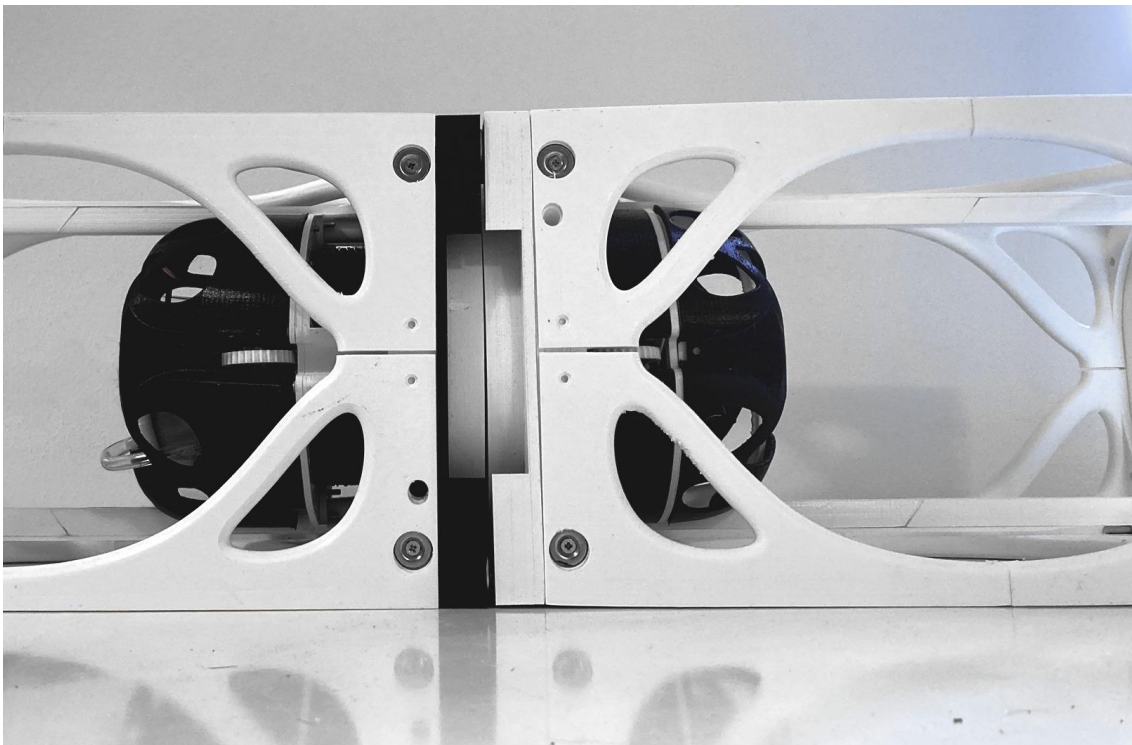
Mole inside of 3D printed MOD in Version 5.
